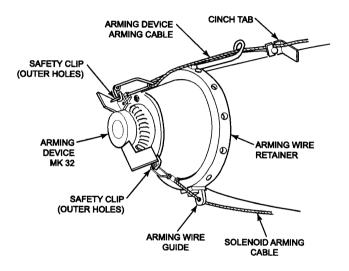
MK 62 w/MK 16 Tail Section (Sheet 2)
